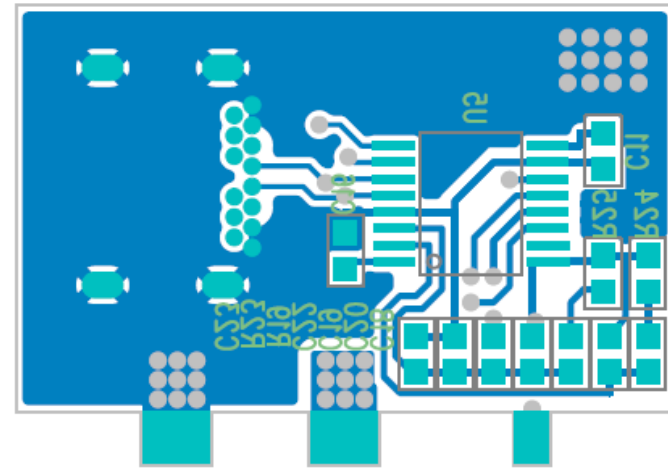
, Bottom View of PD control board (CY2211)'s PCB
